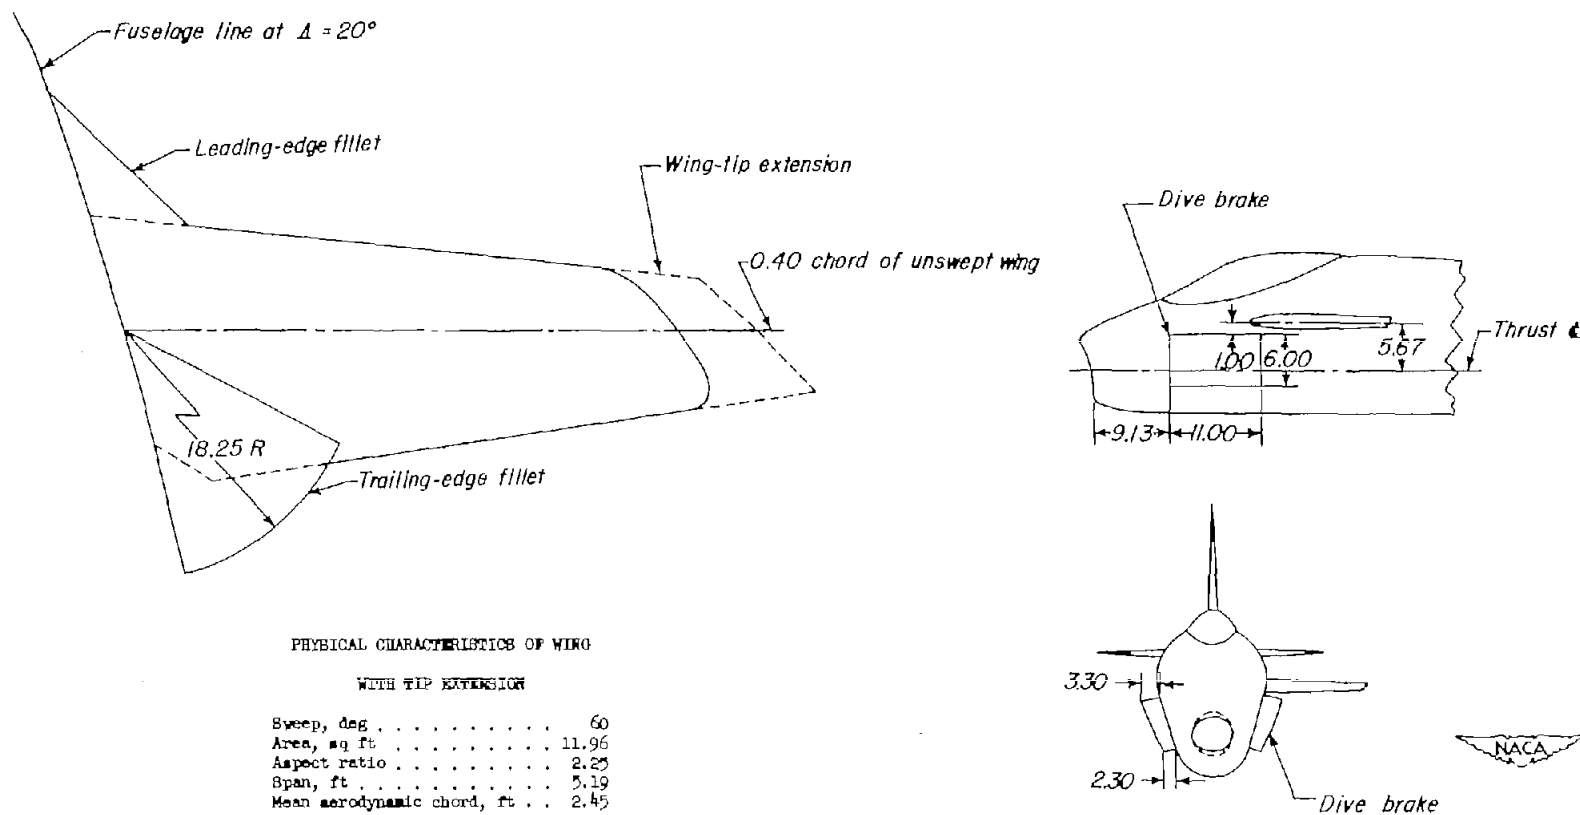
Details of wing-tip extension, trailing-edge fillet, and dive brakes.
